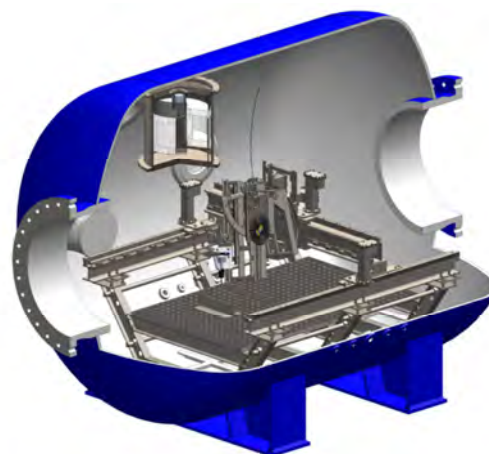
Pressure chamber with multi-axis welding machine
